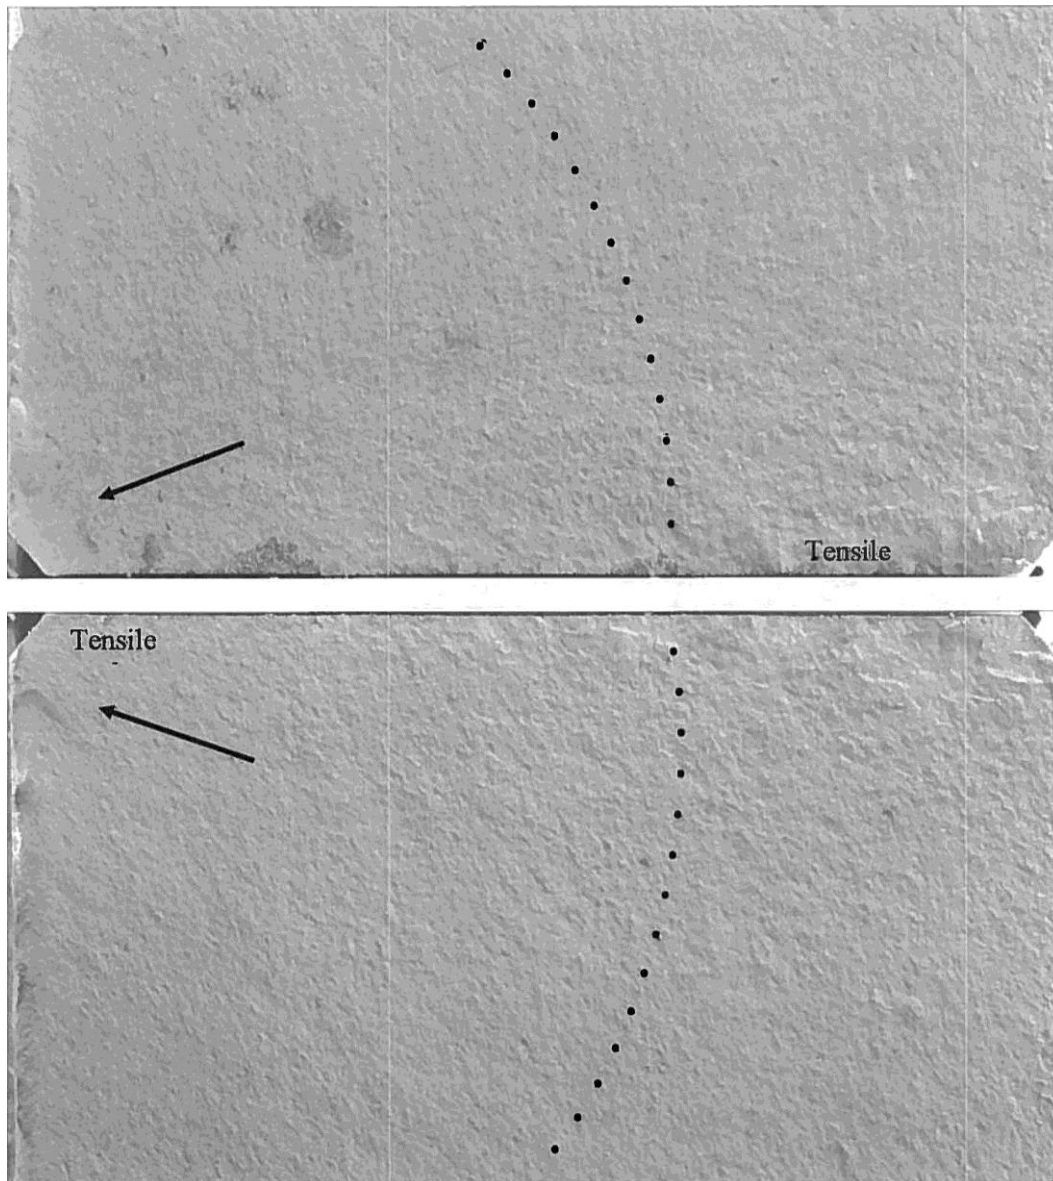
Fracture surface; left and right faces, low-strength bend bar (B)
